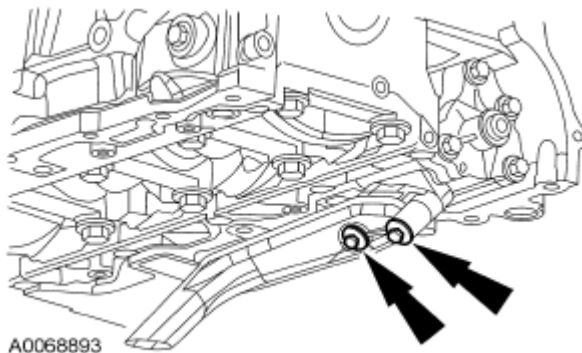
Locating Bolts, Oil Pump Pickup Tube & Gasket
